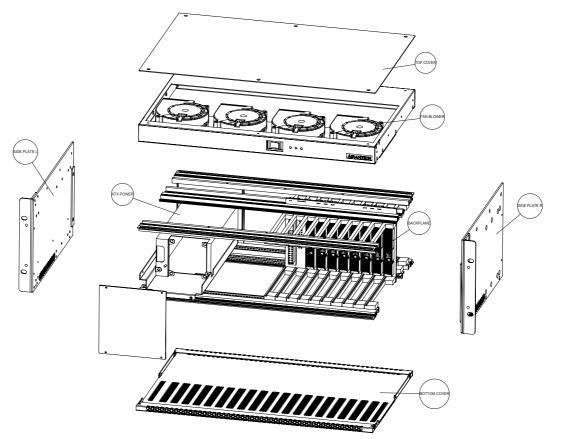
MIC-3022 with ATX Power Supply Explosion View
